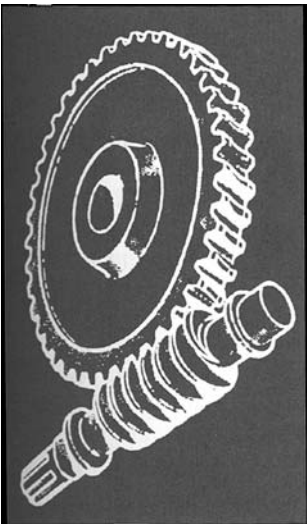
Worm gears. (Courtesy of Lubrizol Corp.)
